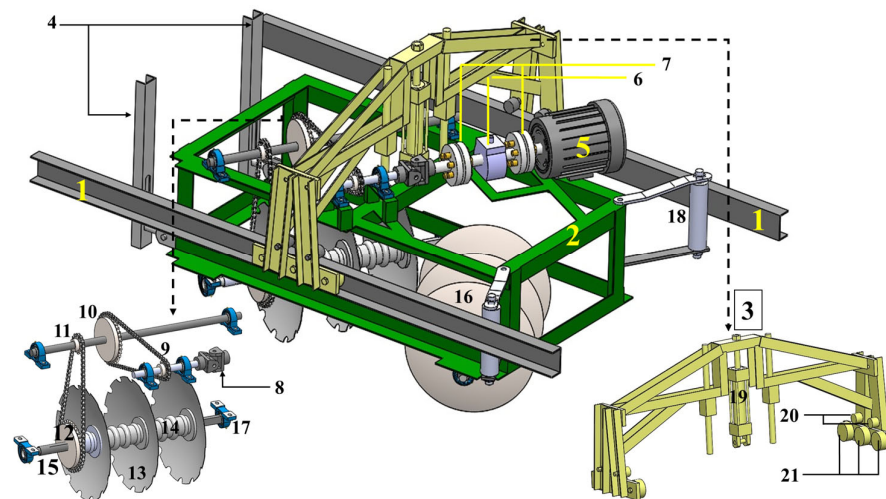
Test rig of the laboratory prototype APDH. (1) Side rail; (2) primary frame; (3) guide frame; (4) C-bar linkage having vertical slot; (5) motor; (6) torque transducer; (7) bellow coupling; (8) universal joint; (9) sprocket 1; (10) sprocket 2; (11) sprocket 3; (12) sprocket 4; (13) notched disc; (14) spool bearing; (15) gang axle; (16) plain disc; (17) pillow block bearing; (18) side roller; (19) double-acting hydraulic cylinder; (20) roller on top of the side rail; (21) roller on C-section of the side rail.
